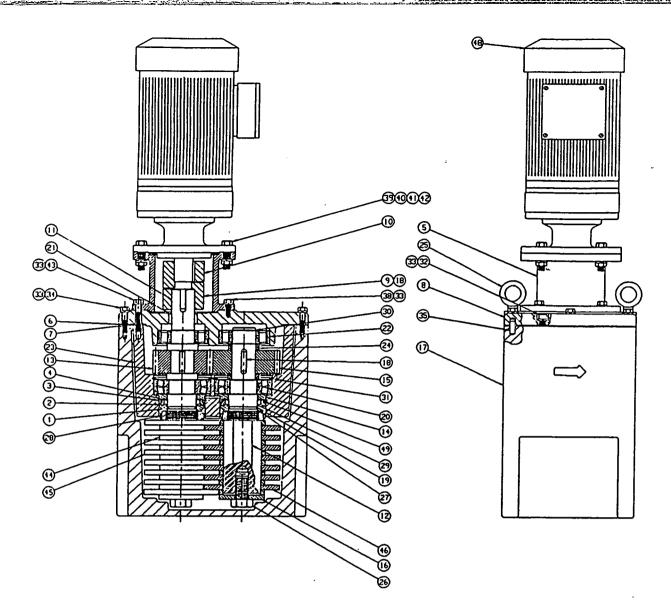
MINI MONSTER ASSEMBLY DRAWING
